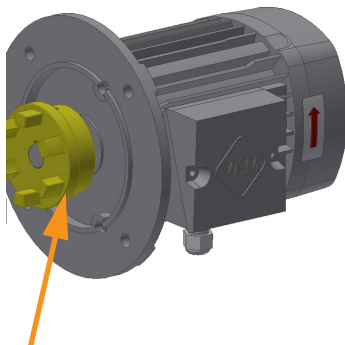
Bearing housing (drive side): Pulling off motor from bearing housing
